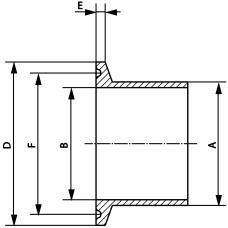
Sectional drawing of a clamp fitting acc. to ASME BPE -BO
